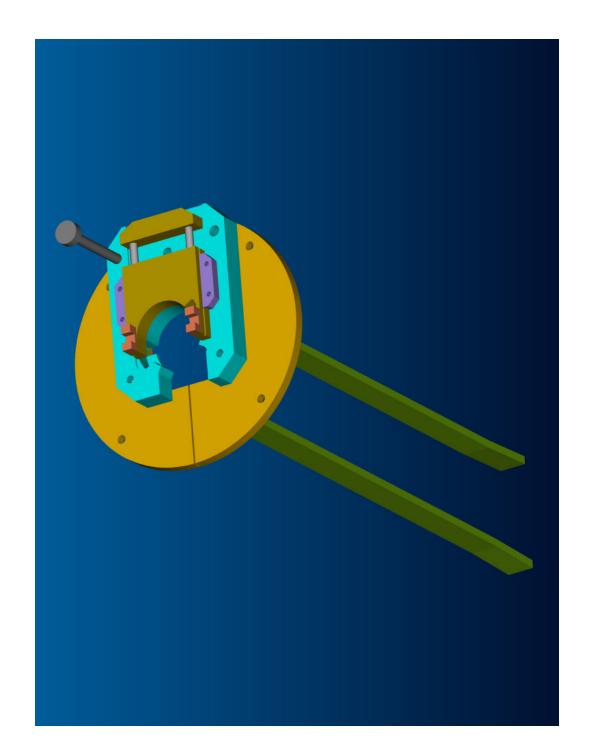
Illustration of the pin block and mounting plate: The pin block is mounted on a split mounting plate that connects to the flange. The split mounting plate allows the easy disassmebly of the system in case of an emergency. The side plates act as guide during the retrieval and prevent the pole from swinging sideways during assembly and disassembly.
